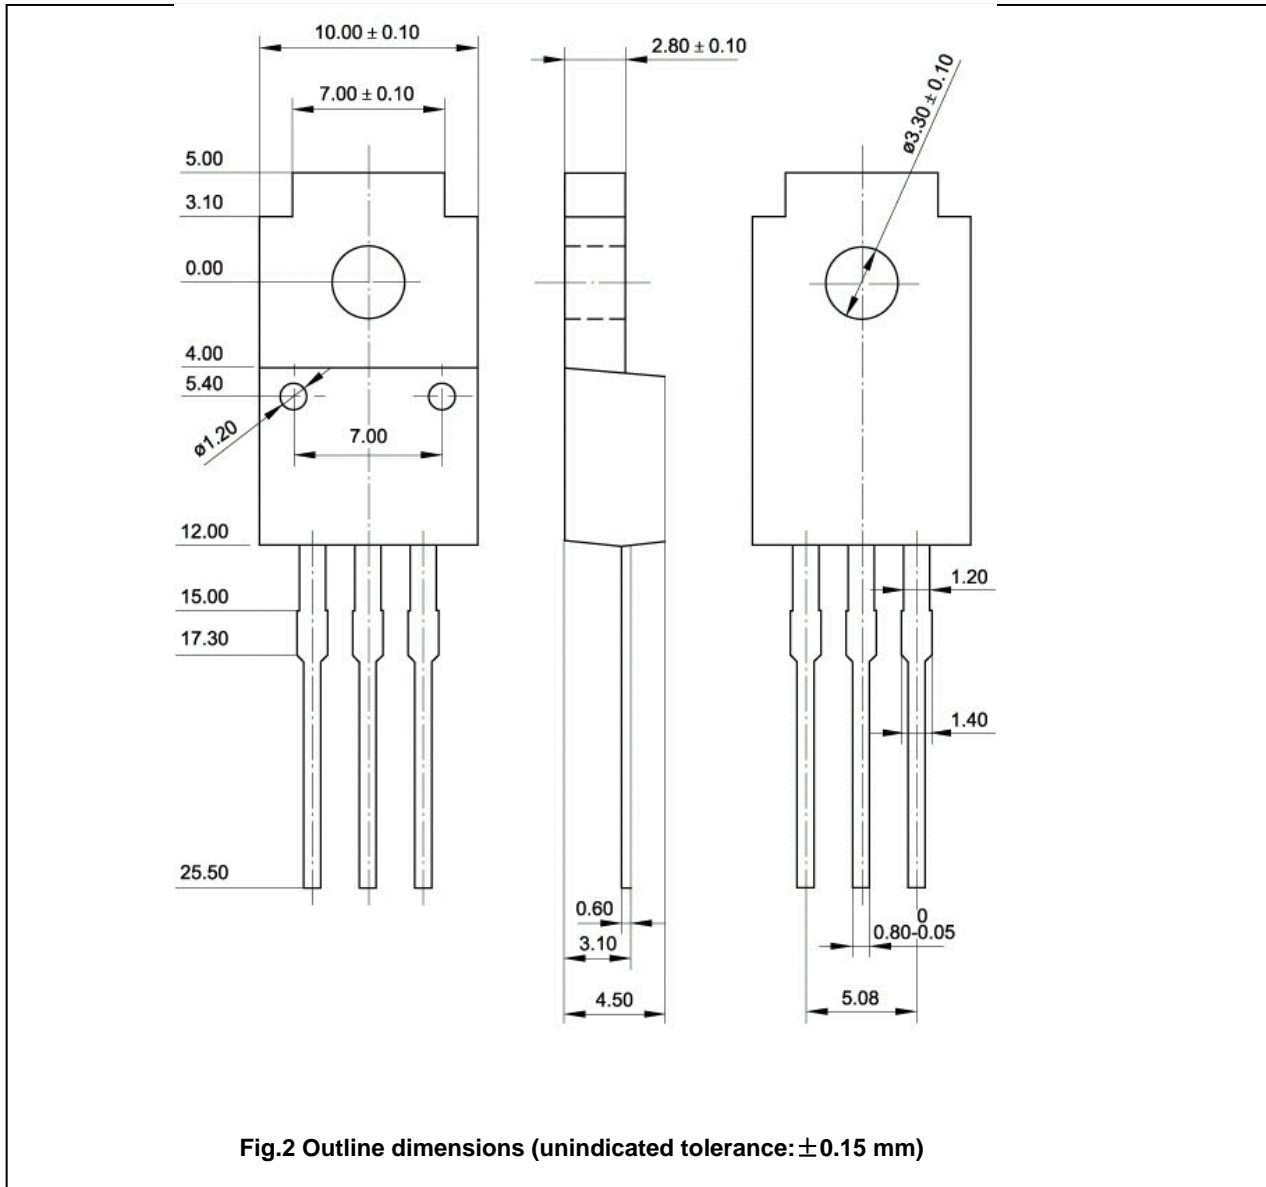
Outline dimensions (unindicated tolerance:  $\pm 0.15$  mm)
